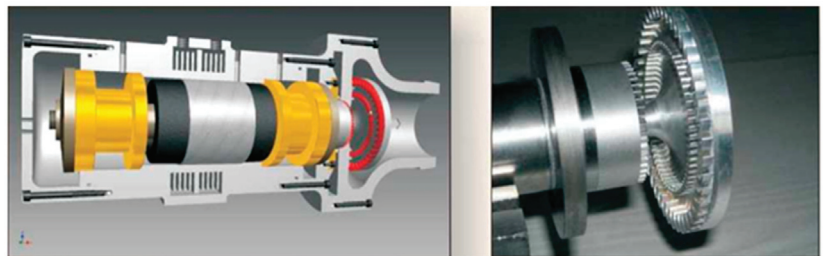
Cross-section and manufactured rotor disc of the four-stage radial microturbine made by Institute of Fluid Flow Machinery [148].
